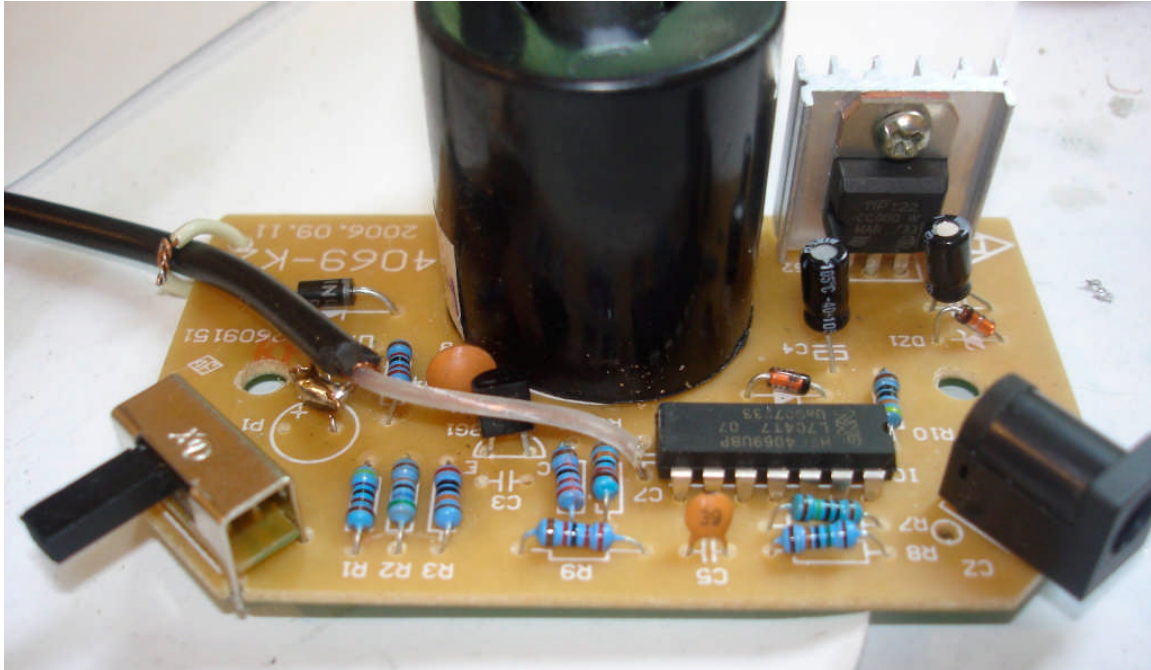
Location of New Audio Feed Cable on Modified Board. Capacitor C3 is Removed
